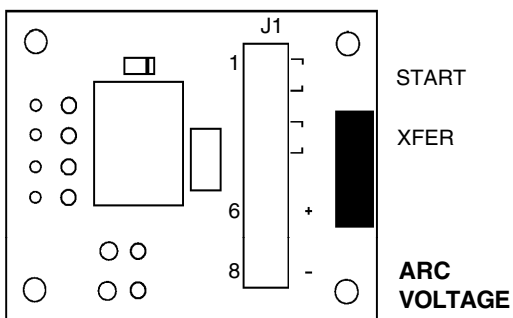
Feeding Arc Voltage Cable to Machine Interface Board (208/240/480V power supply shown)
